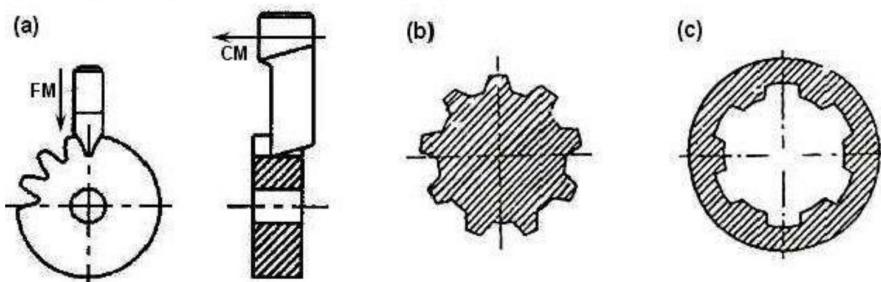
Machining of (a) External gear (b) External splines and (c) Internal splines in a shaper
